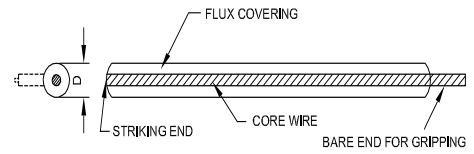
SMAW Electrode During Welding
